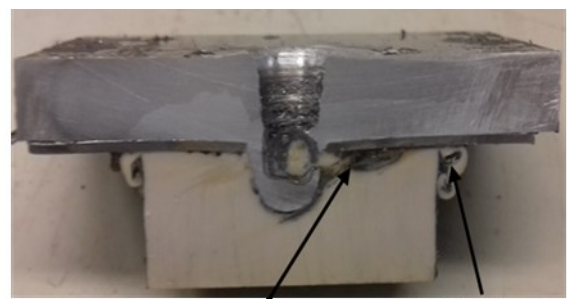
Sample with Weld Depth Between (9-13) mm
